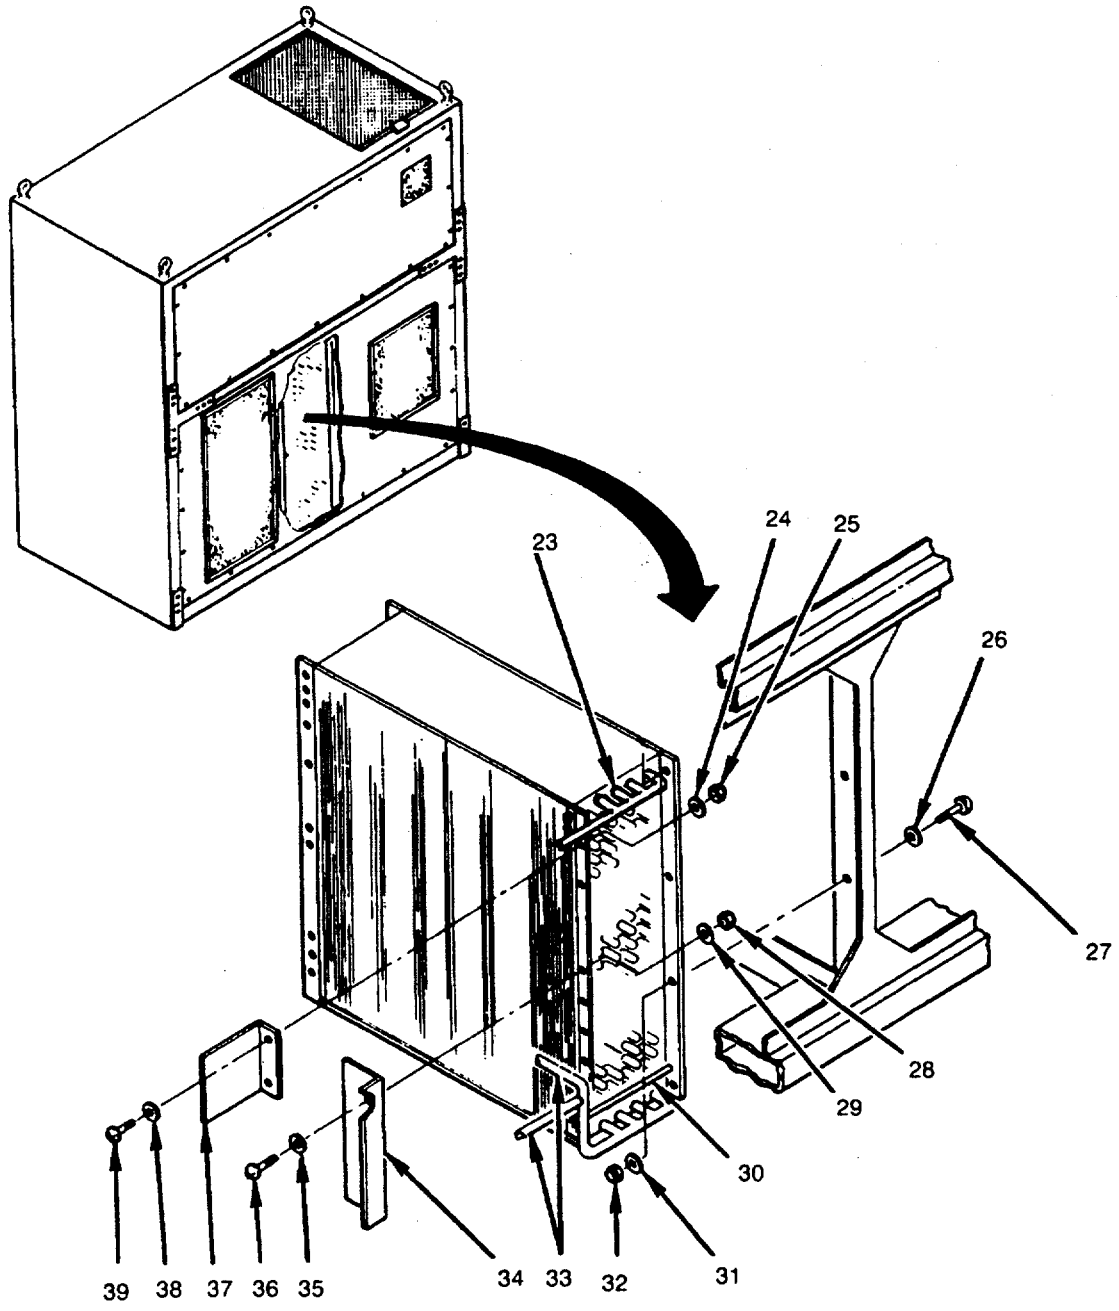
Condenser Coil Removal (Sheet 2 of 2)
